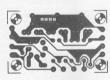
Printed circuit board and component layout for the sensitive lightmeter
